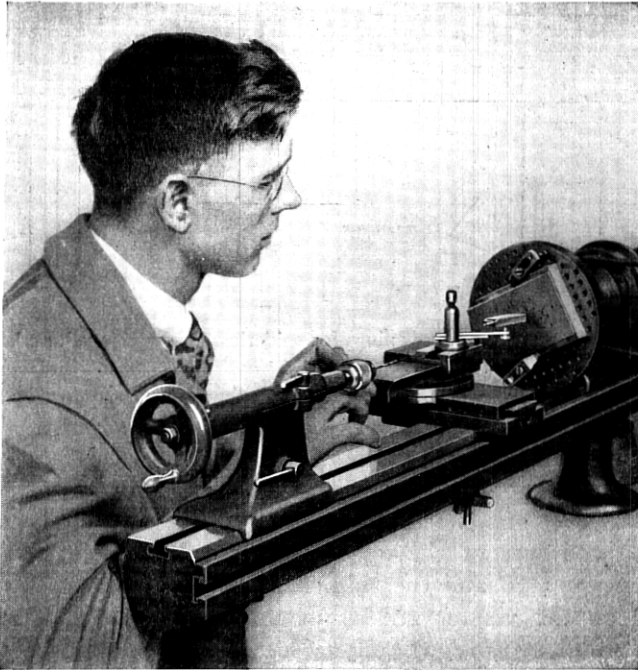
Transferring datum holes from master plate to die block on bench lathe.
